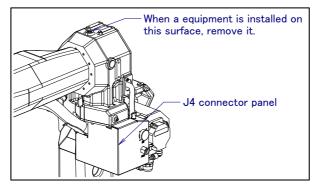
(b) Removing equipment of the ventilator hole
